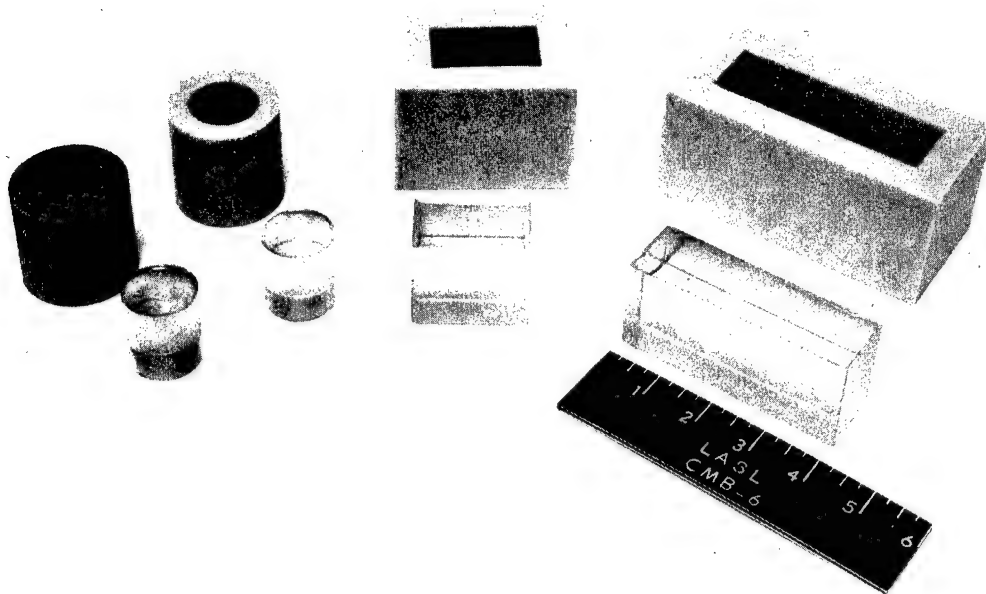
Standard Molds and Mounts (left), and New Molds and Mounts (right) Developed for Larger Size Specimens.
